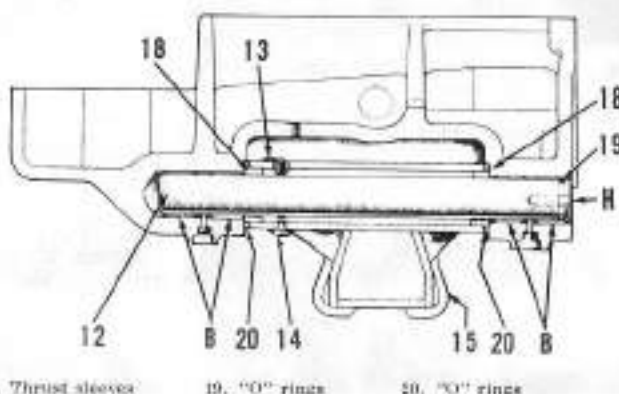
Cross-sectional view of front support showing pivot pin installation typical of models 880, 990 and 1200. A tapered hole (H) is provided so that pin can be removed with slide hammer. Bolt (14) on model 990 with heavy duty front axle is located on top side of front center member.
